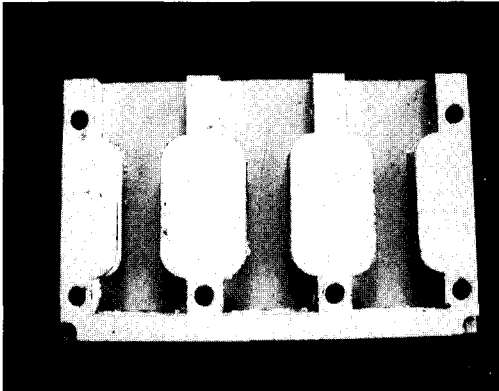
Mold for Tensile Test's Specimens of External Insulation
